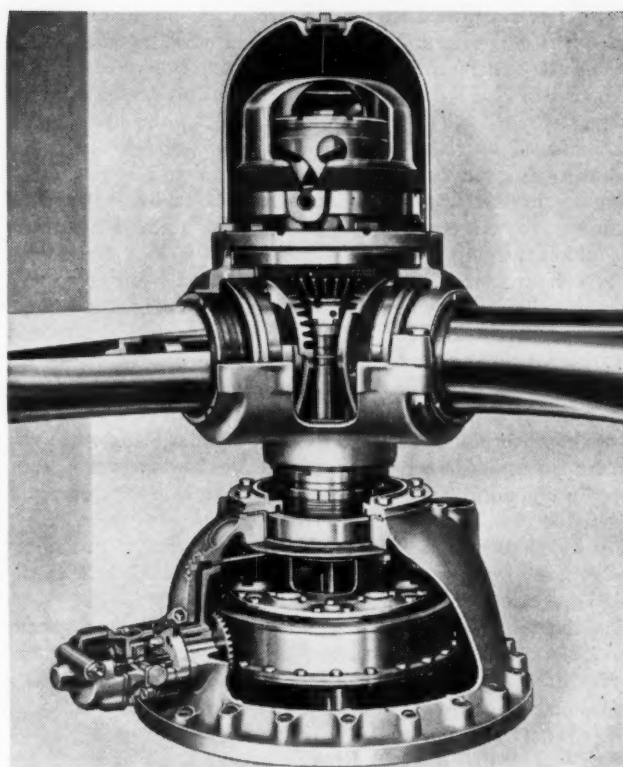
CUTAWAY VIEW OF HYDROMATIC PROPELLER AND CONSTANT-SPEED GOVERNOR INSTALLED ON NOSE SECTION OF AIRPLANE ENGINE
